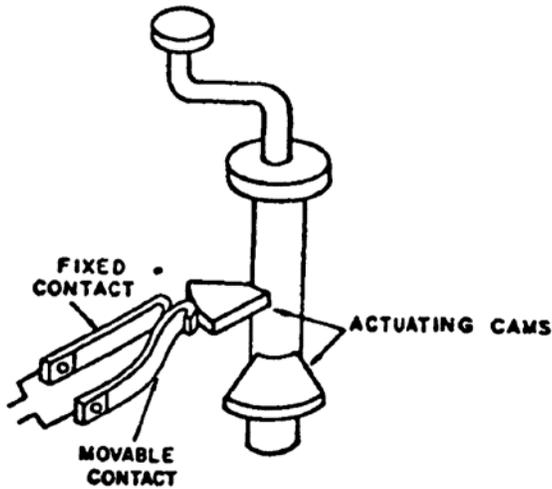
Cam type drum switch
